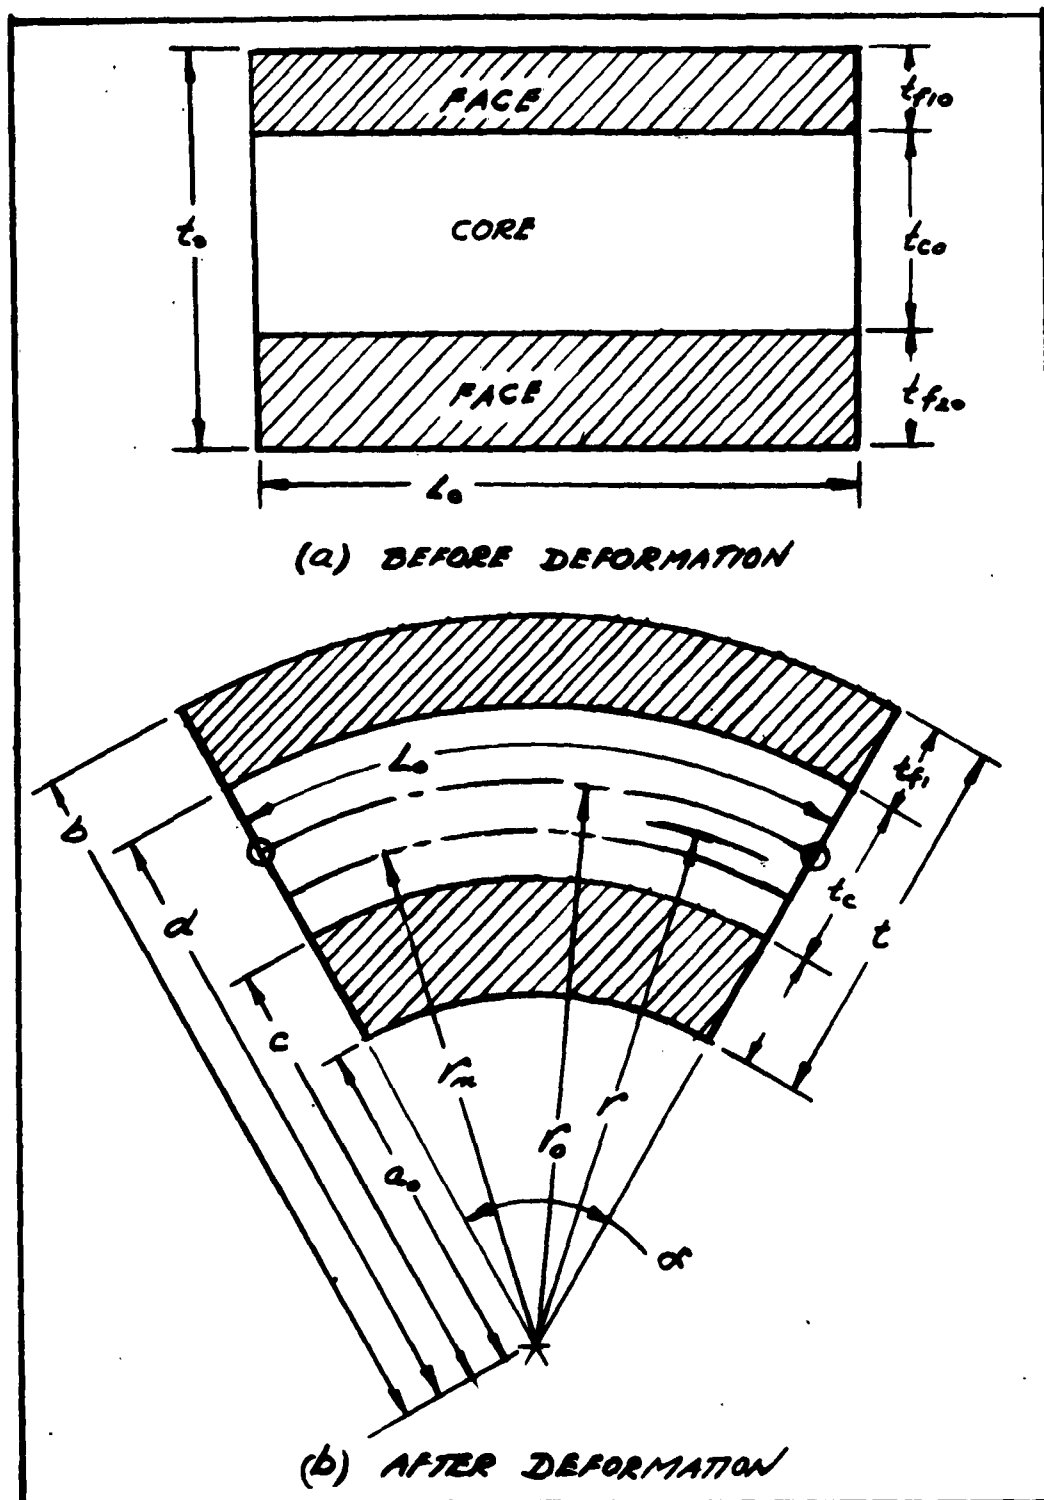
Dimensions of an Element of a Bent Multi-Layer Sheet
